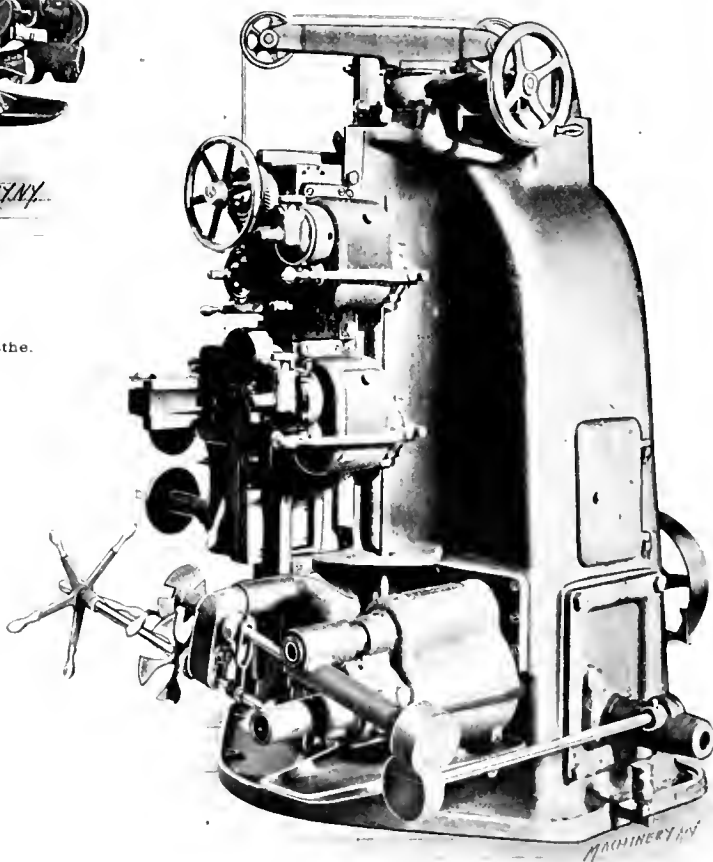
The Driving and Feed Mechanism of the Bullard Turret Lathe.
